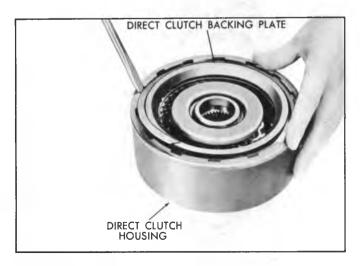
T-Installing Direct Clutch Housing to Backing Plate Snap Ring
